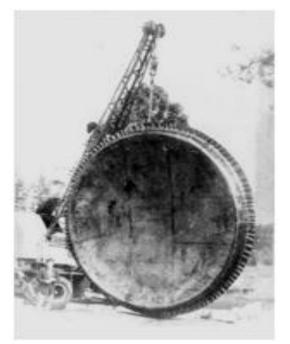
Explosion-stamped parabolic reflector, diameter 5000 mm
